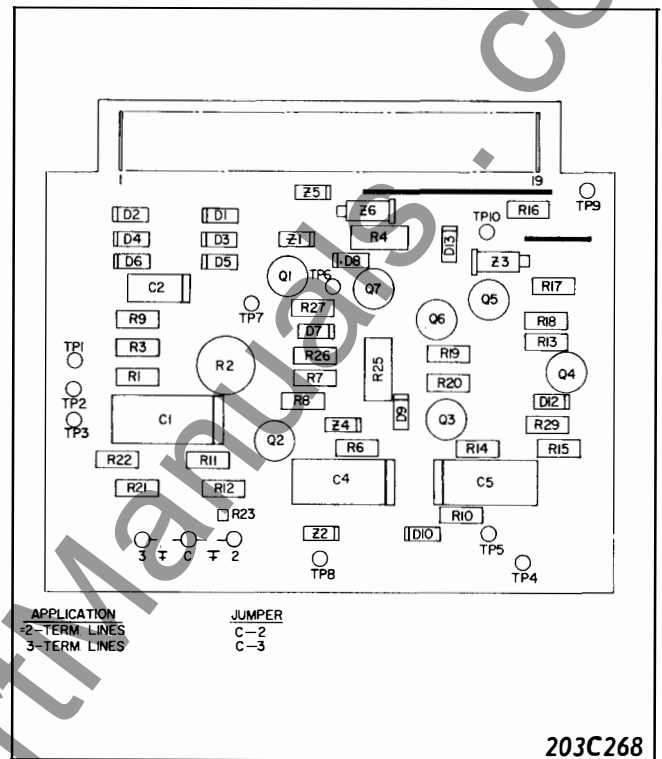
Printed Circuit Board Component Location, SKB or SKB-1 Relay
